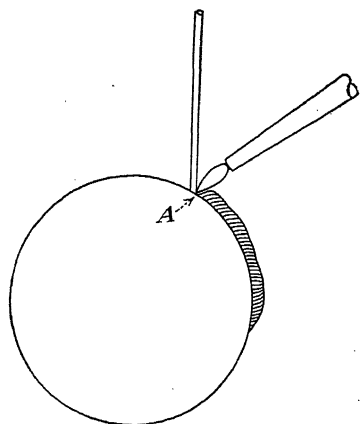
Top shoulder of pipe. The weld puddle is easily controlled at this point.
